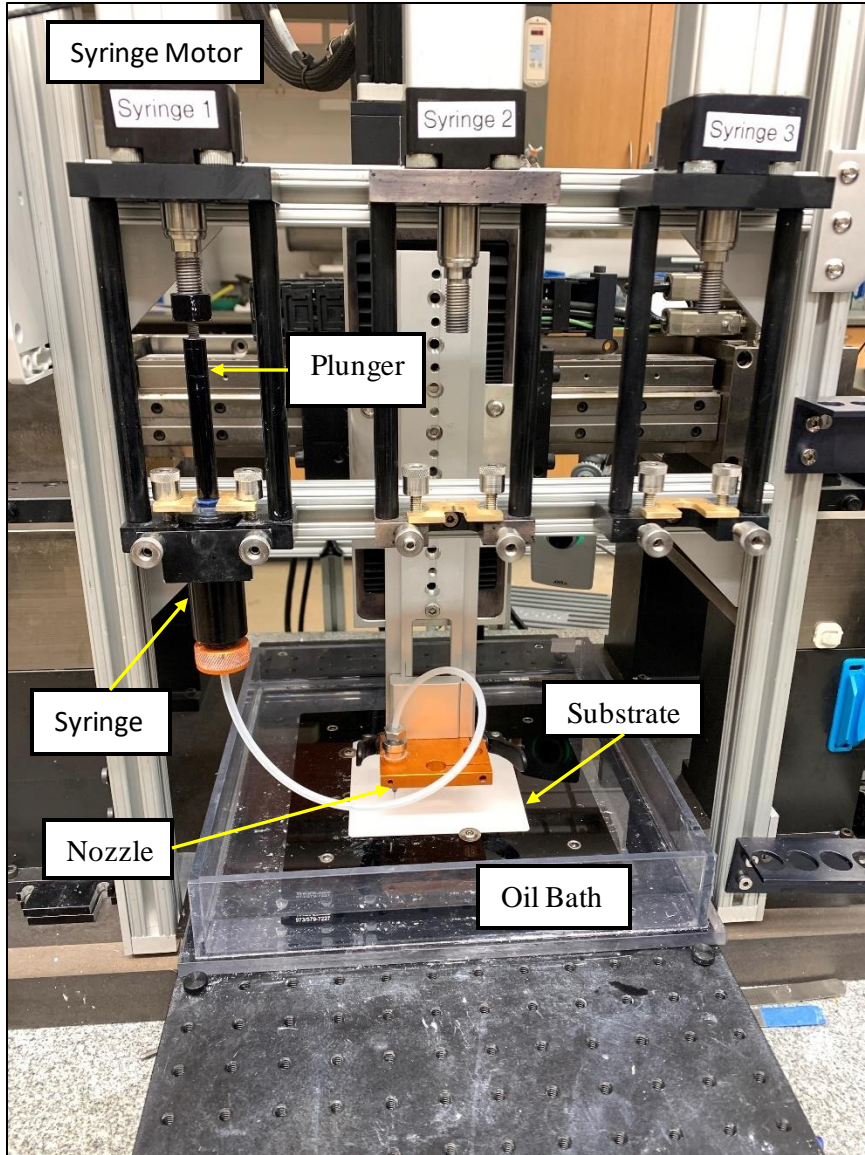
Ink Syringe and Nozzle mounted and secured in the robocast printer.
